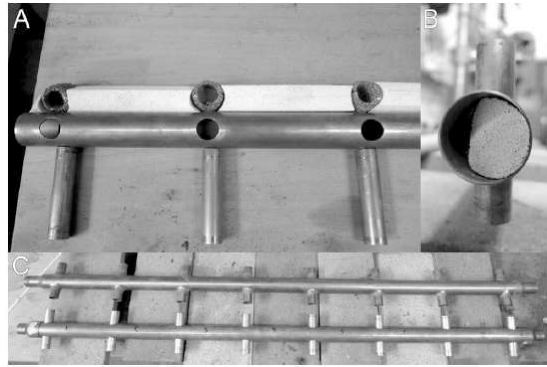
Photography of manifold header prototype from different phase of manufacturing (A)-illustration of inner arrangement, (B)-front view of partially assembled manifold, (C)-comparison of standard manifold (top) and prototype of manifold header (bottom), where is clearly visible similar dimensions [242].
